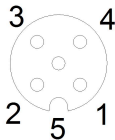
Schematic drawing I/O port as M12 socket IO-Link
